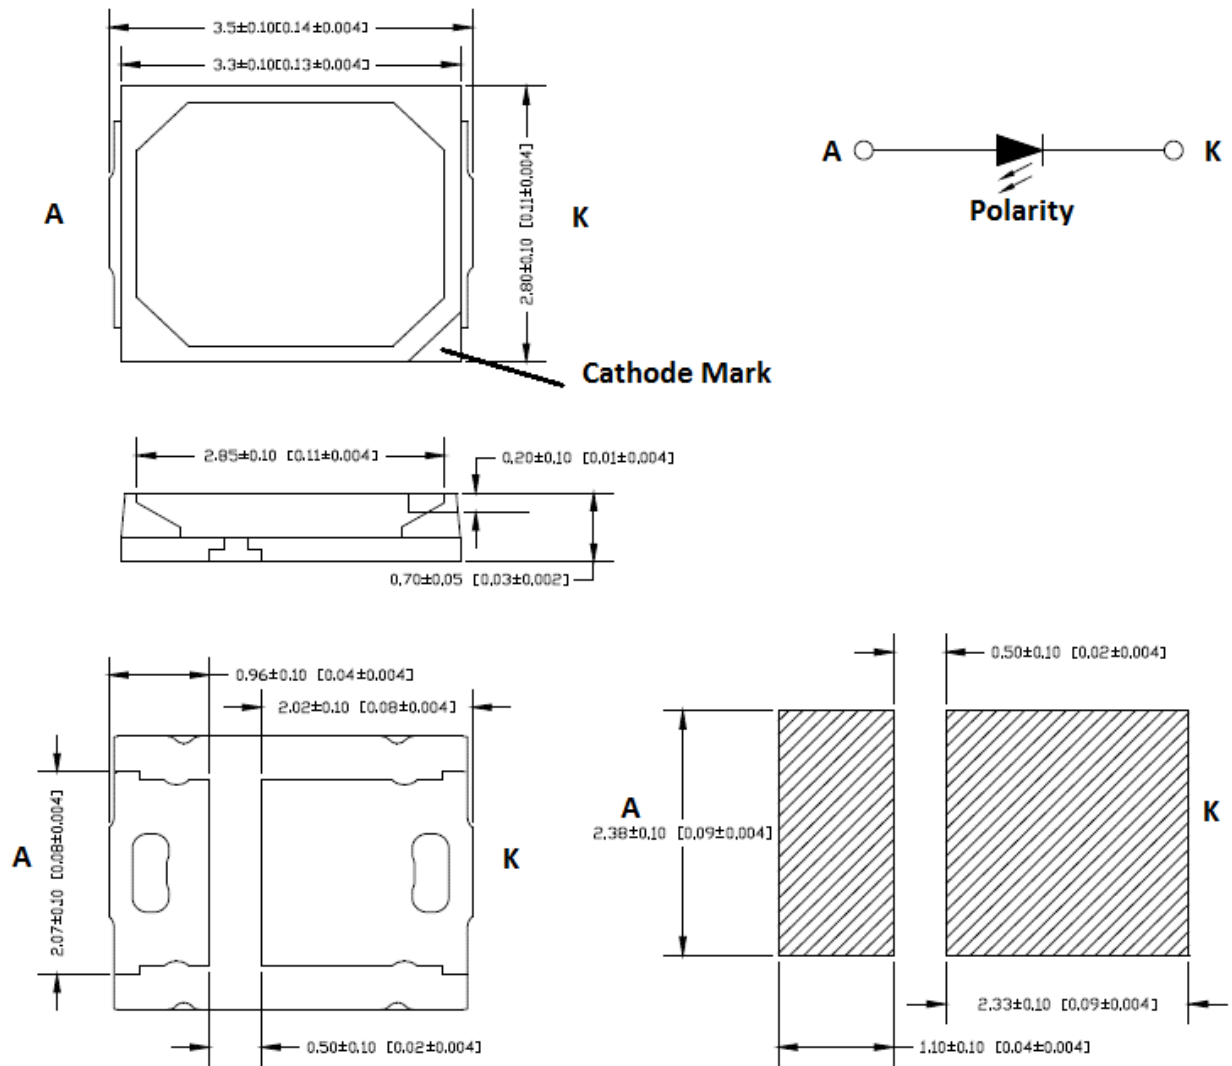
Mechanical Drawing & Soldering Pattern of the 2835 package
